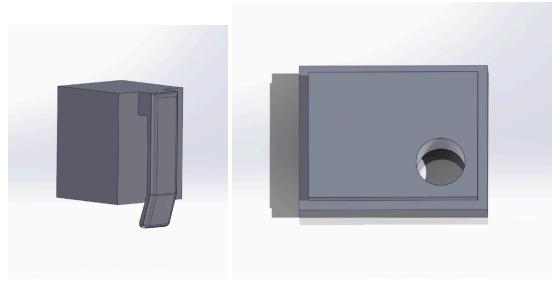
Dimetric view (left) and bottom view (right) of the second prototype's main housing
